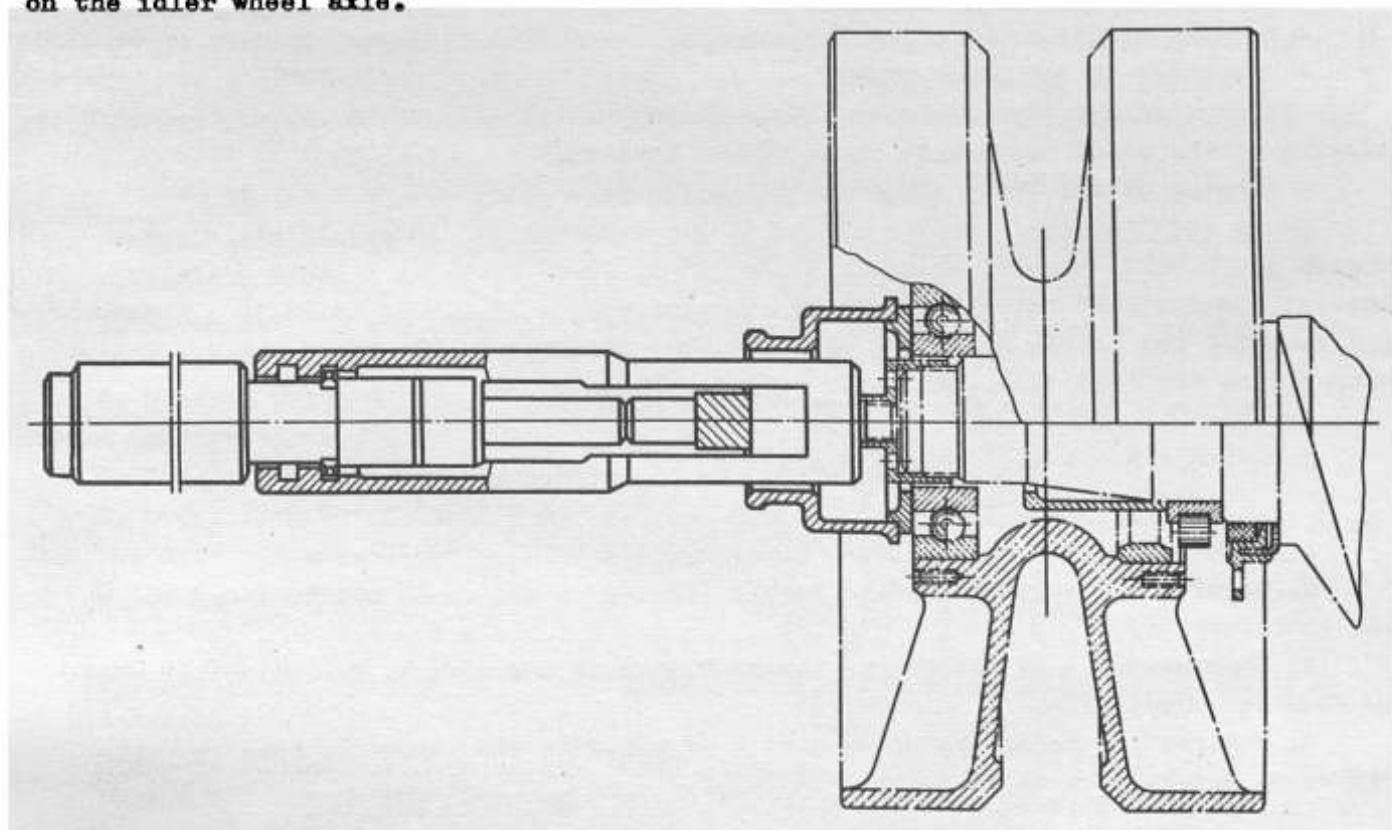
MOUNTING FIXTURE YK-8A FOR PRESSING ON THE IDLER WHEEL
